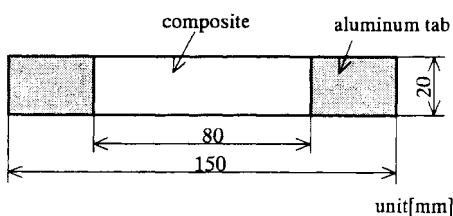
Dimensions of specimen for the tensile test of BFRC.
